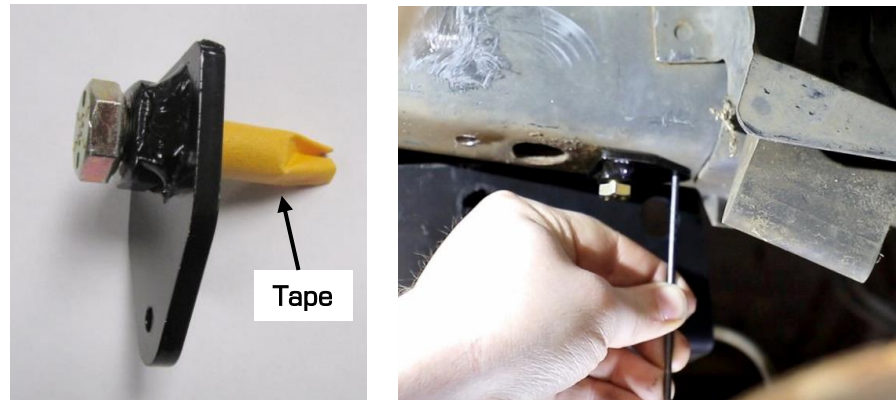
Locate Single Weld Nut Doubler Plate
